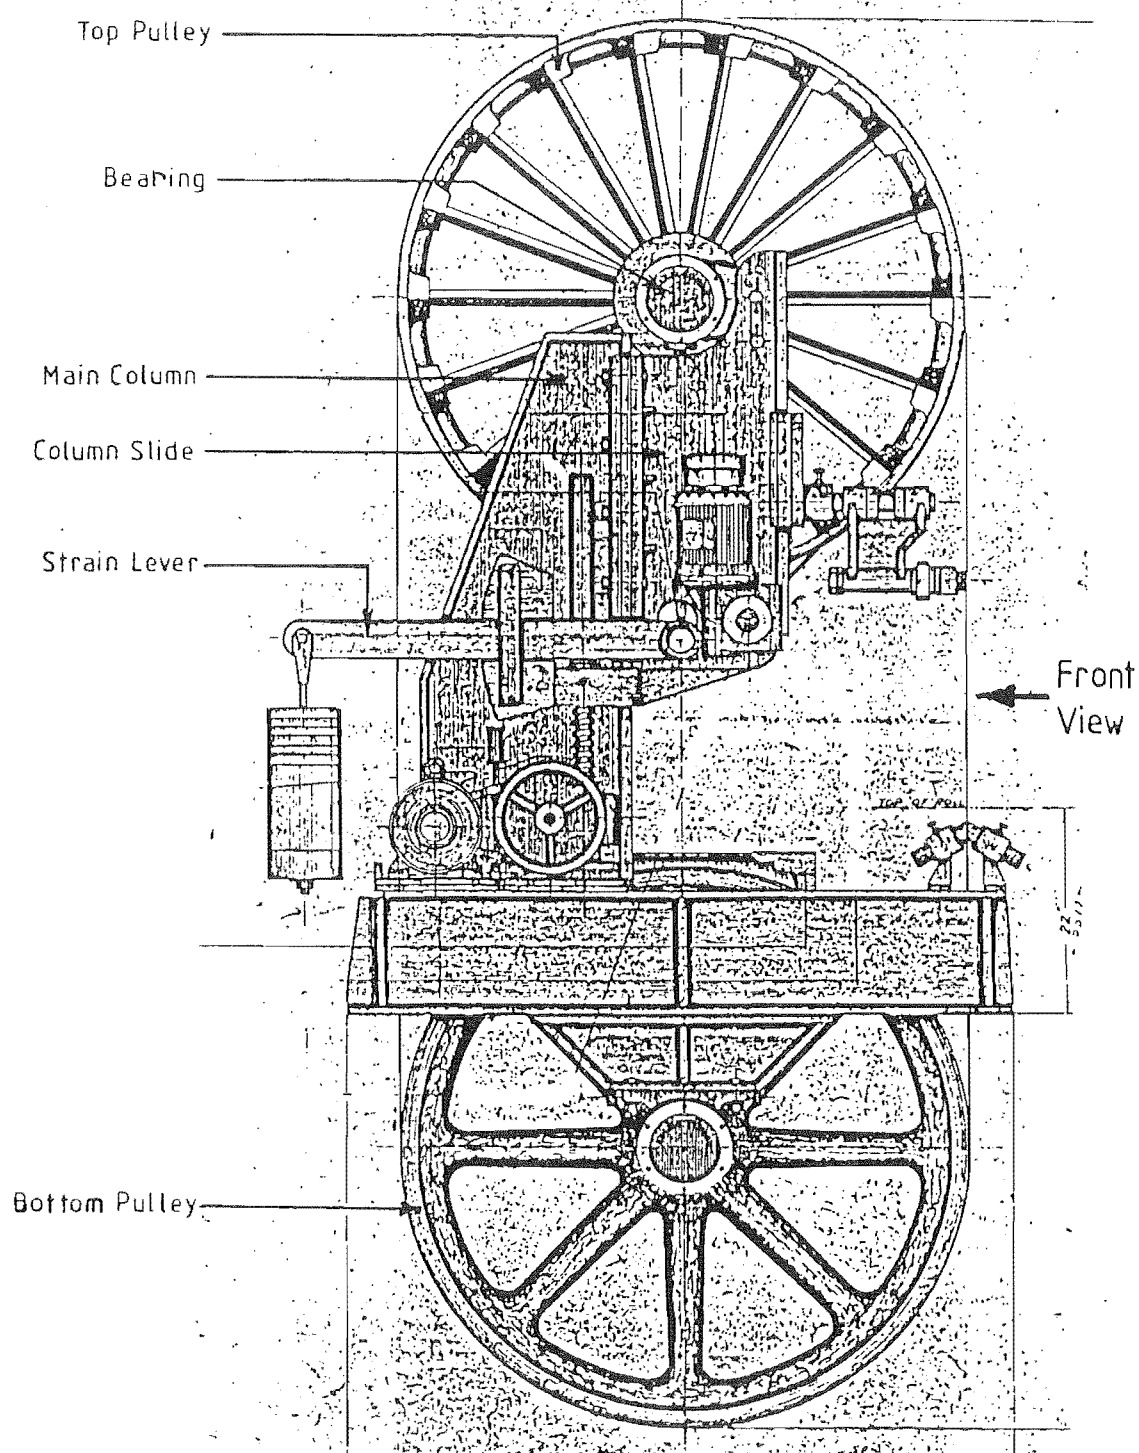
General assembly of a 60 in. band head rig. Right side view.
